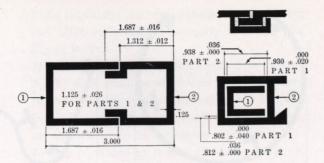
Sliding Fits are employed to form hollow shapes by sliding sections together. If assemblies are used for continual sliding or if they are frequently disengaged, it is necessary to apply a lubricant such as a zinc stearate or molybdenum sulfide compound to prevent tightening of the fit from surface galling.
